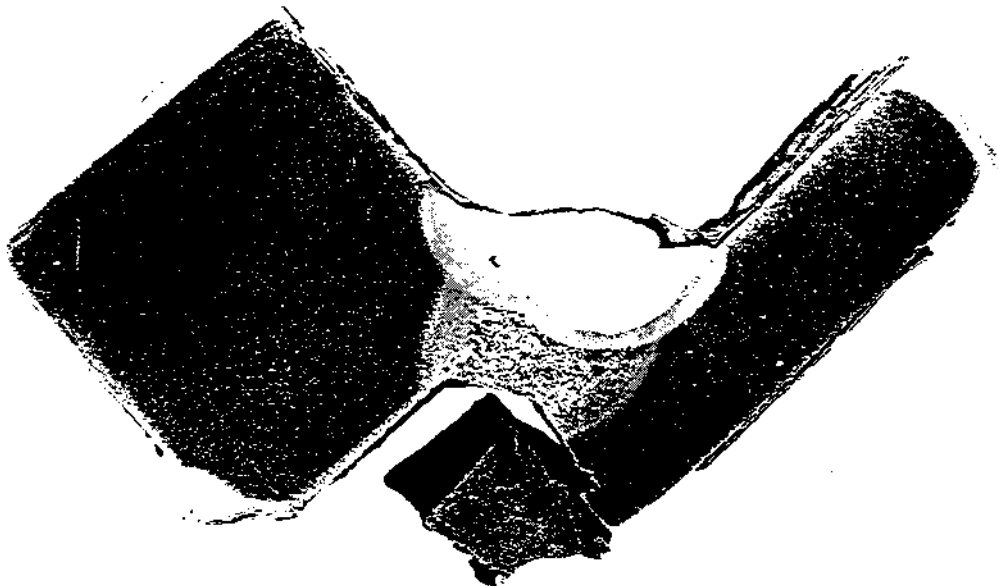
Cross section of side lock specimen marked SL2 (ca 2.5x)
